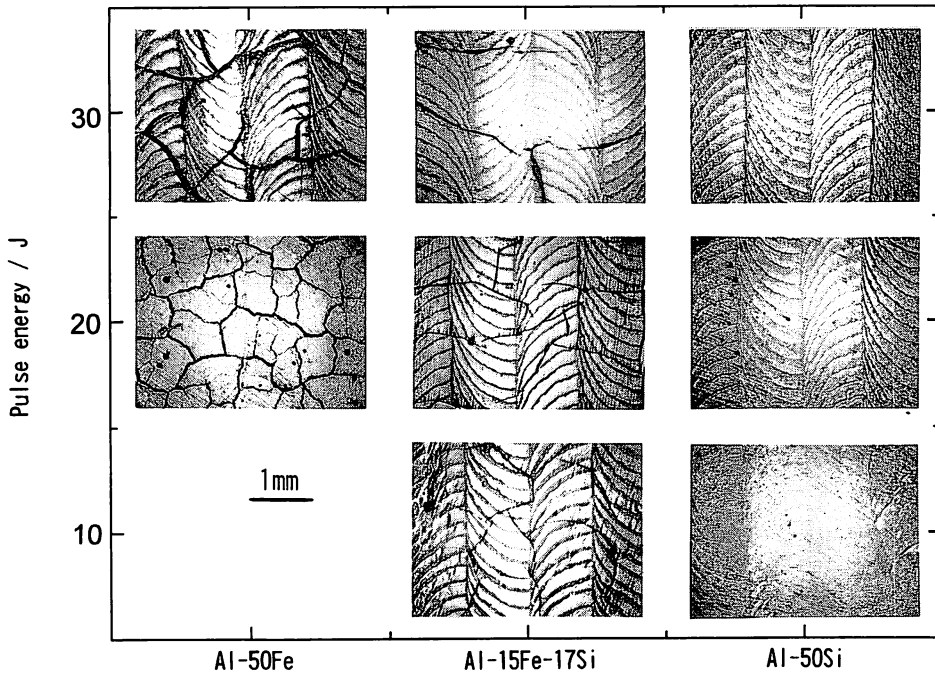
Surface appearance of laser-remelted layers after polishing.
